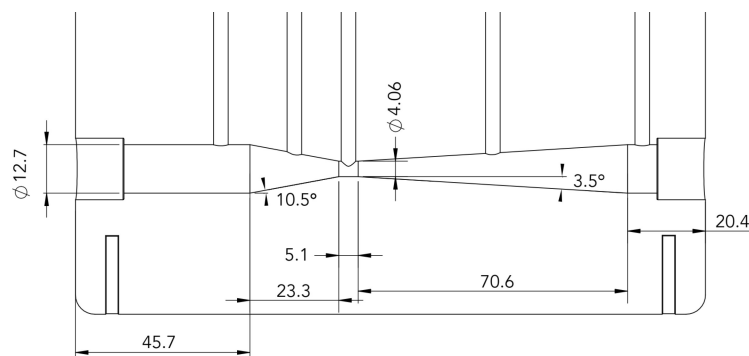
CAD drawing of the venturi meter (front view). The dimensions are in millimeters.
